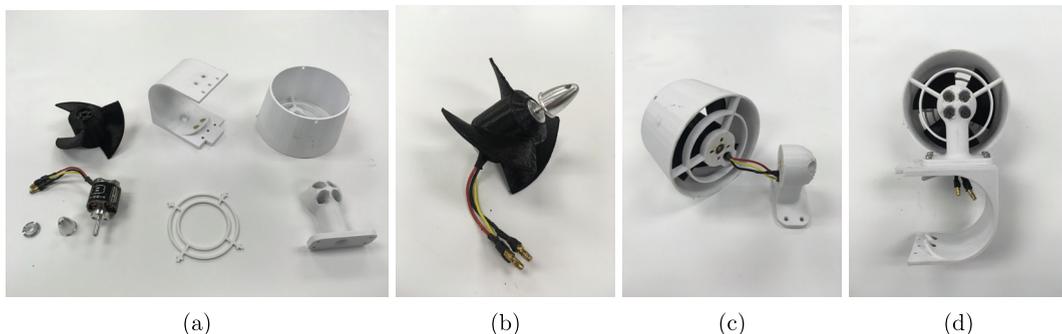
Assembly procedures of propeller: (a) fabricate the 3D printed components for building a propeller assembly, (b) assemble the BLDC motor and the propeller by fastening a propeller adapter, (c) attach the propeller on thrust holder part, and (d) add thrust holder to connect it with an arm holder part.
